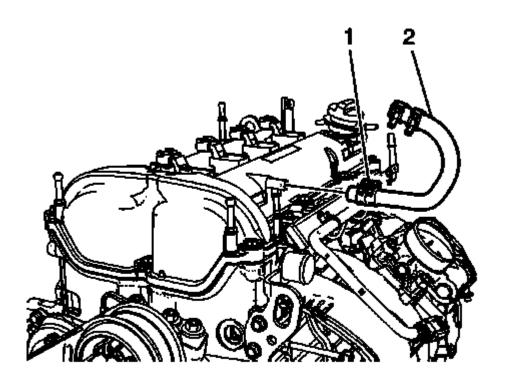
PCV Hose Courtesy of GENERAL MOTORS COMPANY
